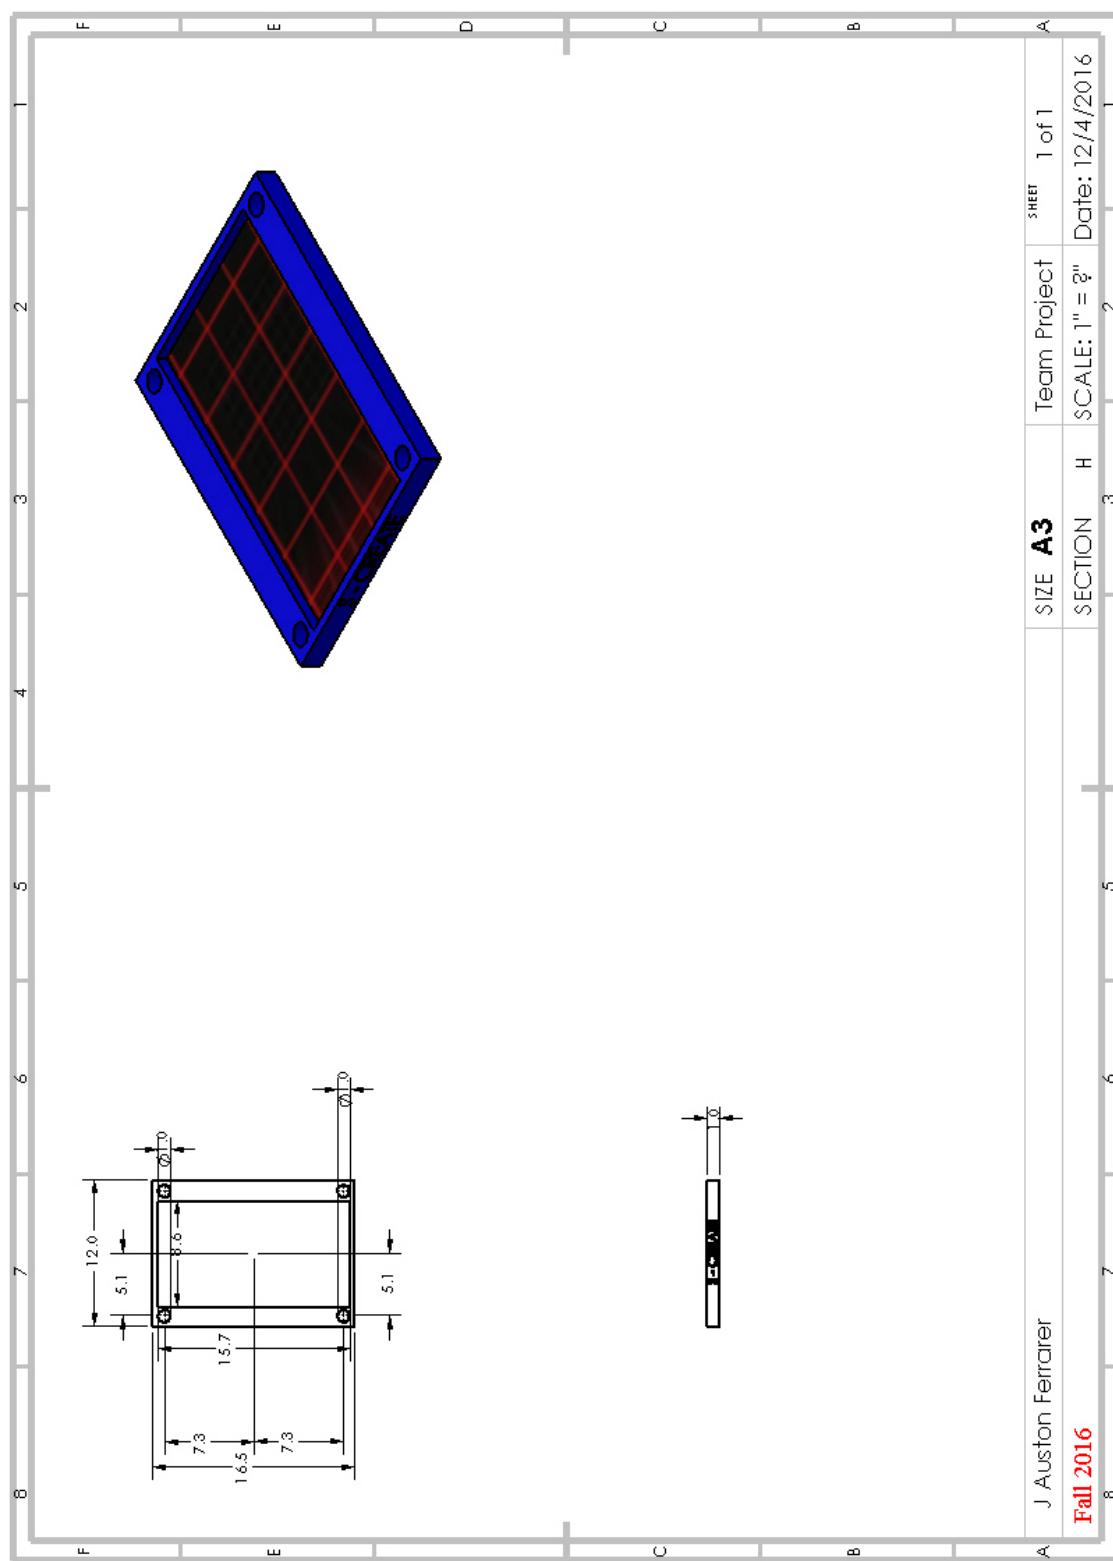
Ferrarer, Auston: Printing Pad
